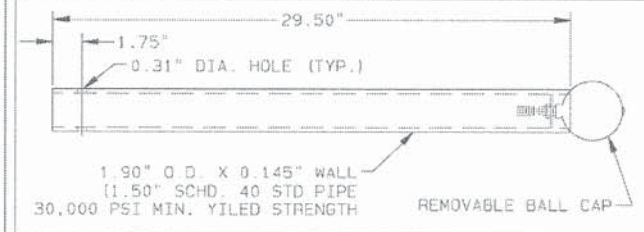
| BANNER ARM ATTACHMENT-CLAMP
